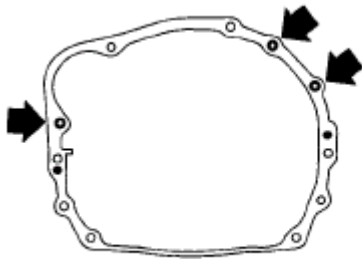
Identifying Bolts For Right Upper Side Of Transmission To Engine
